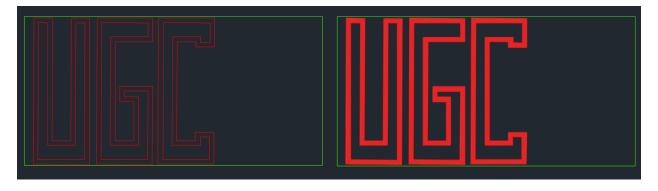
UGC Upper Tower CNC routed Letter depth detail
